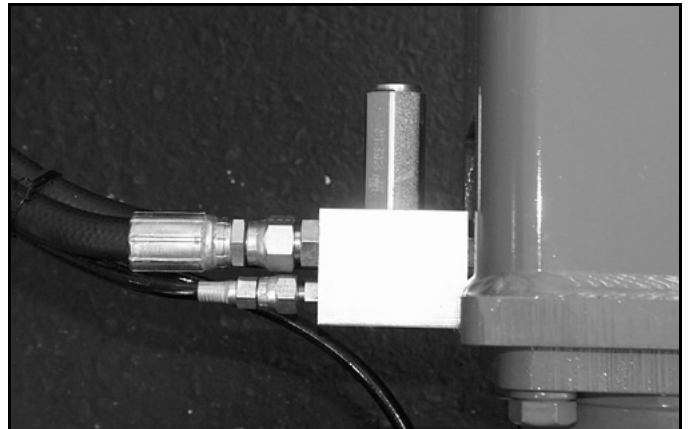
Drive Cross Relief Valve (Front Shown)
